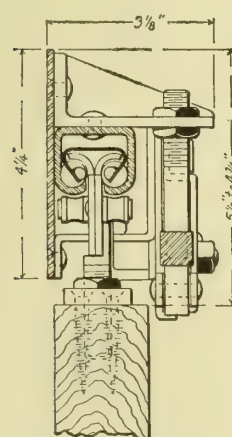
CROSS-SECTION 730 ELEVATOR DOOR HANGER
